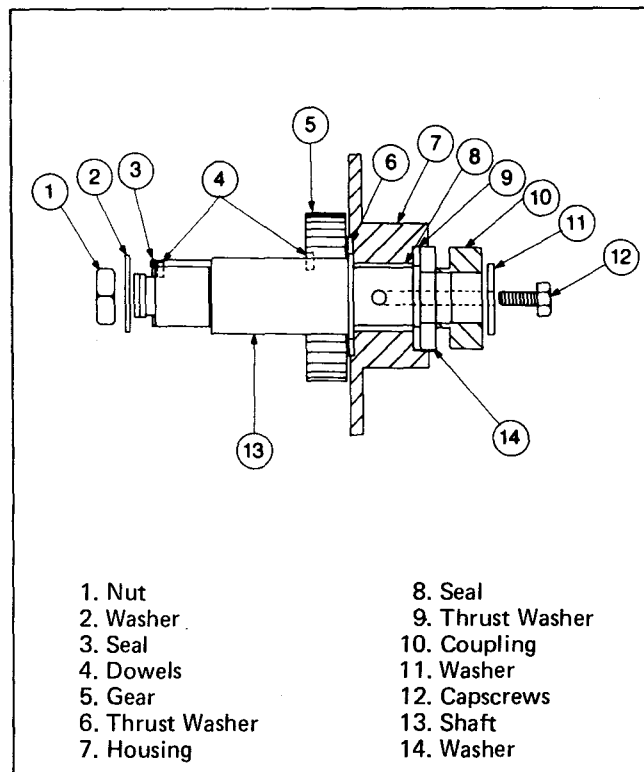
, (N10911). Dowel pin shaft accessory drive
